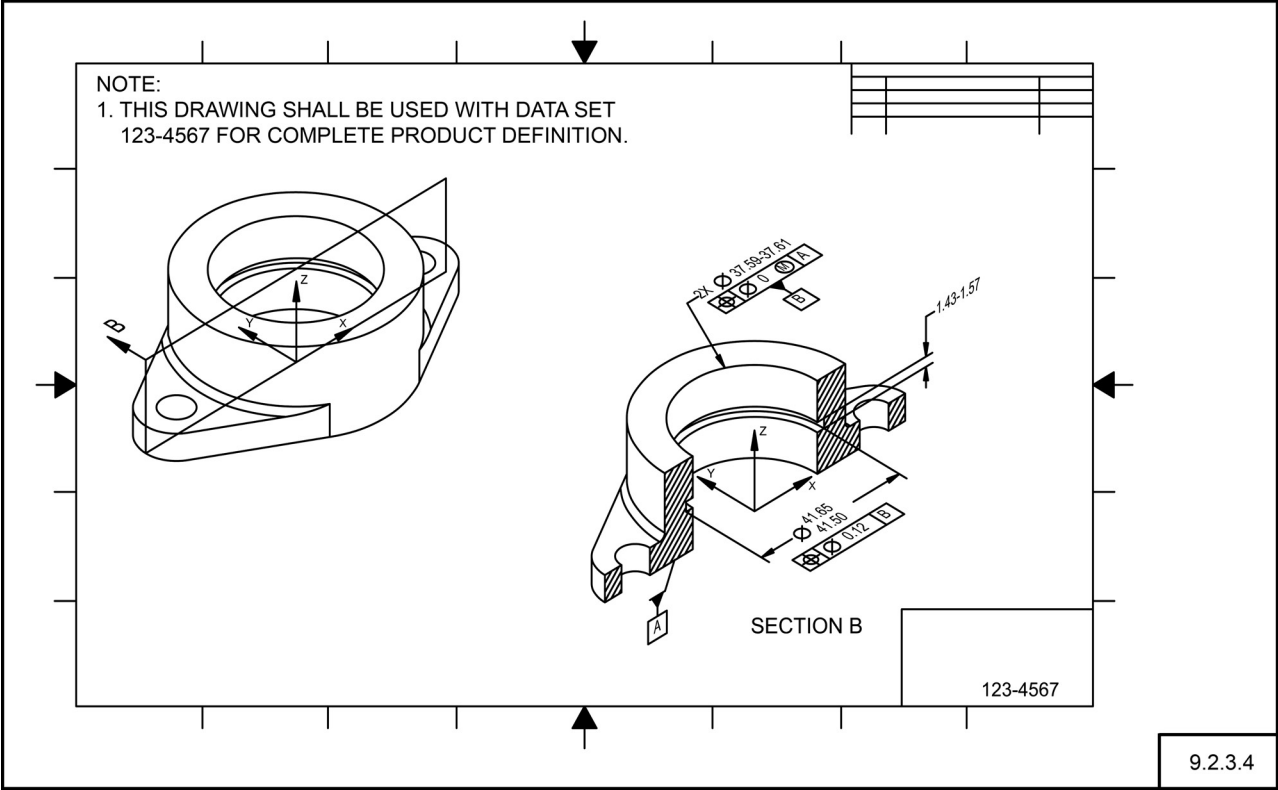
Drawing Graphic Sheet, Cutting-Plane Intersection Lines Shown
